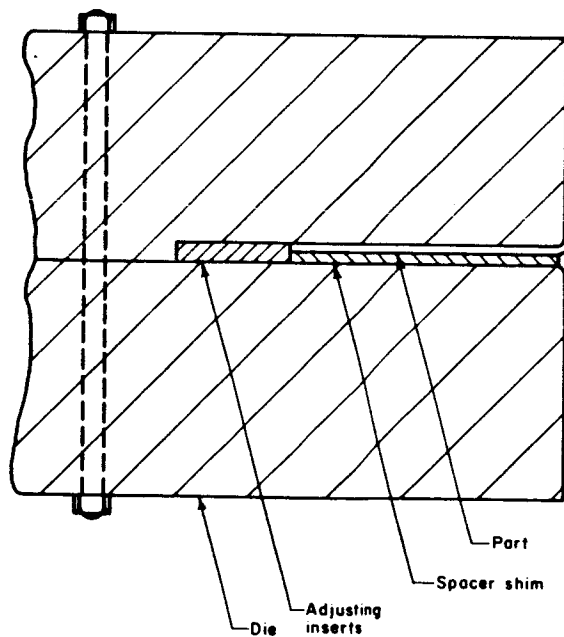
SECTIONAL VIEW OF LINEAR STRETCH TOOLING FOR HEEL-OUT ANGLES (REF. 26)
